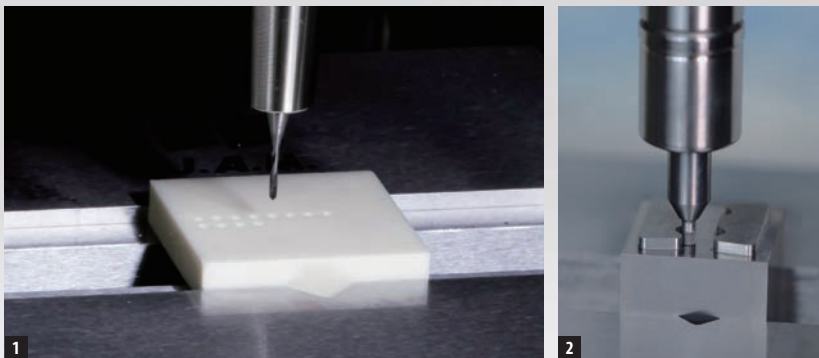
is an internal thread milling example in quartz glass. The PCD-MTM demonstrates high machining efficiency and good thread quality.
